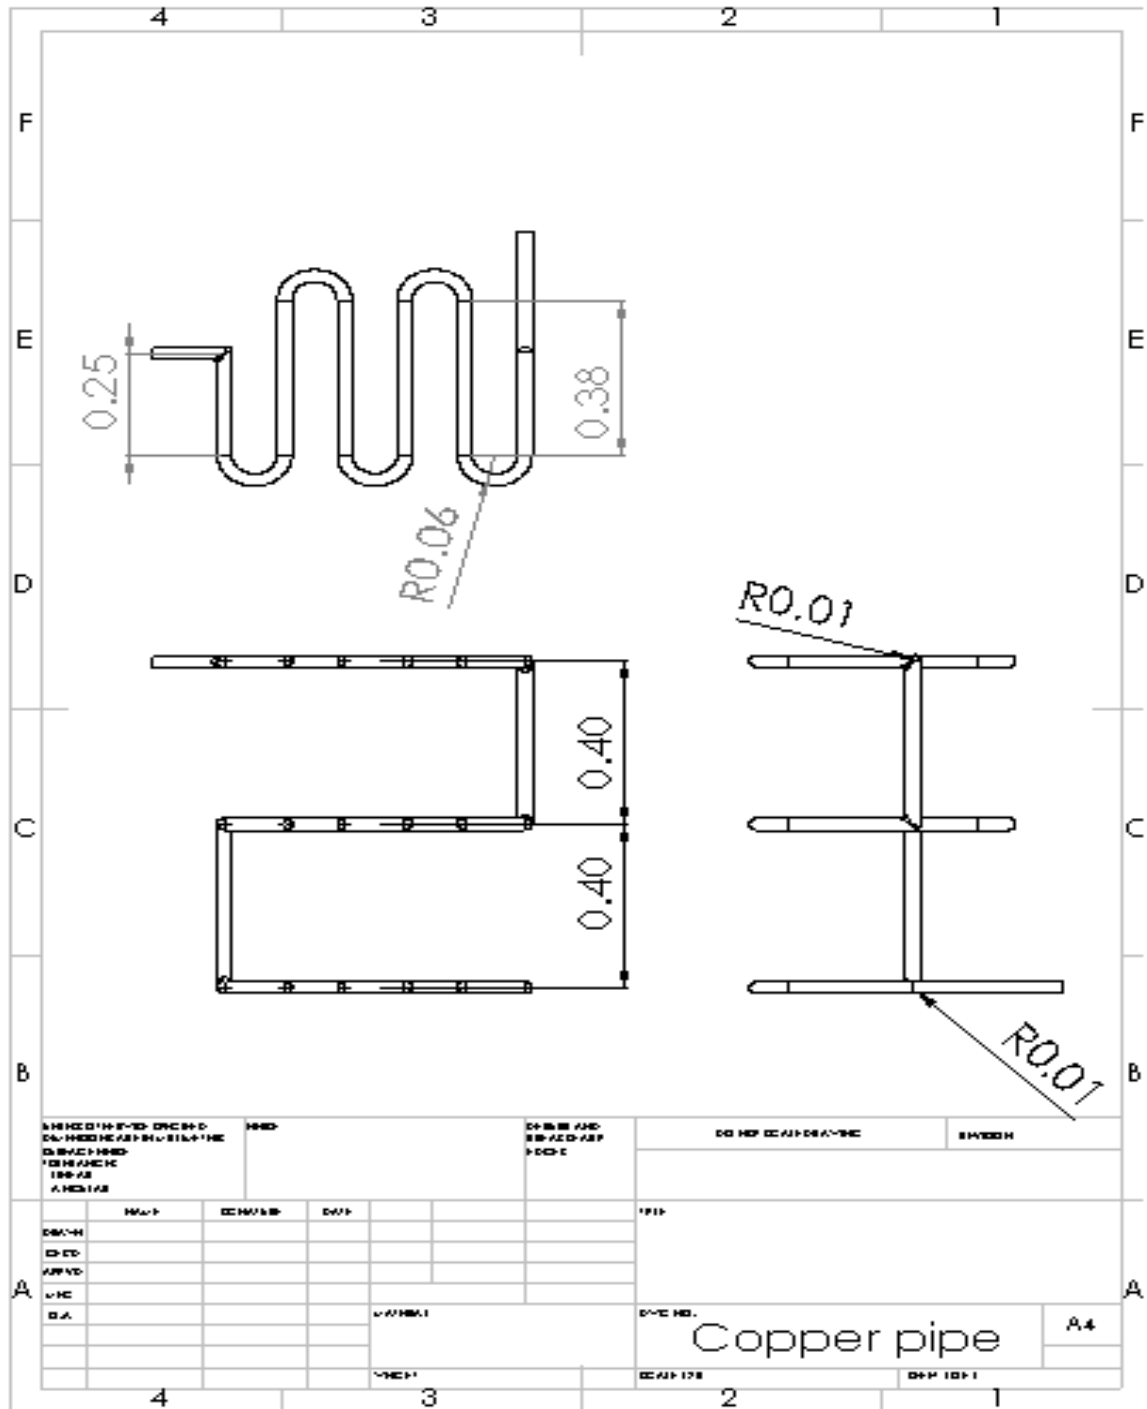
Manufacturing drawing for water circulating copper pipe
